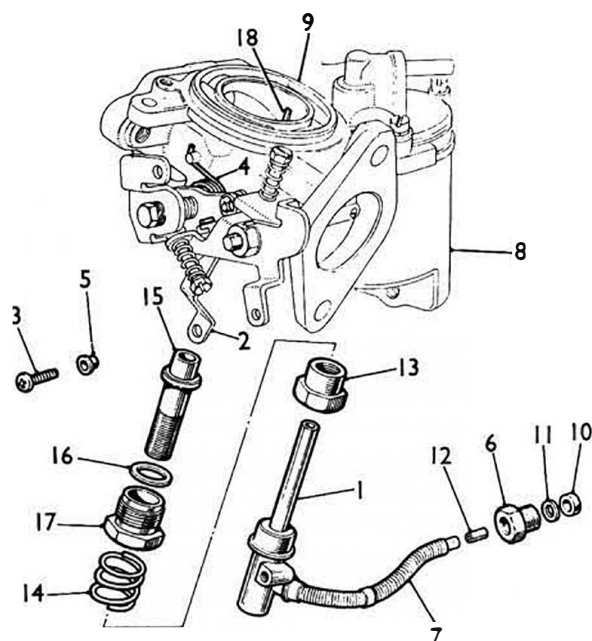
DISMANTLING THE HS6 CARBURETTOR - STAGE 3
